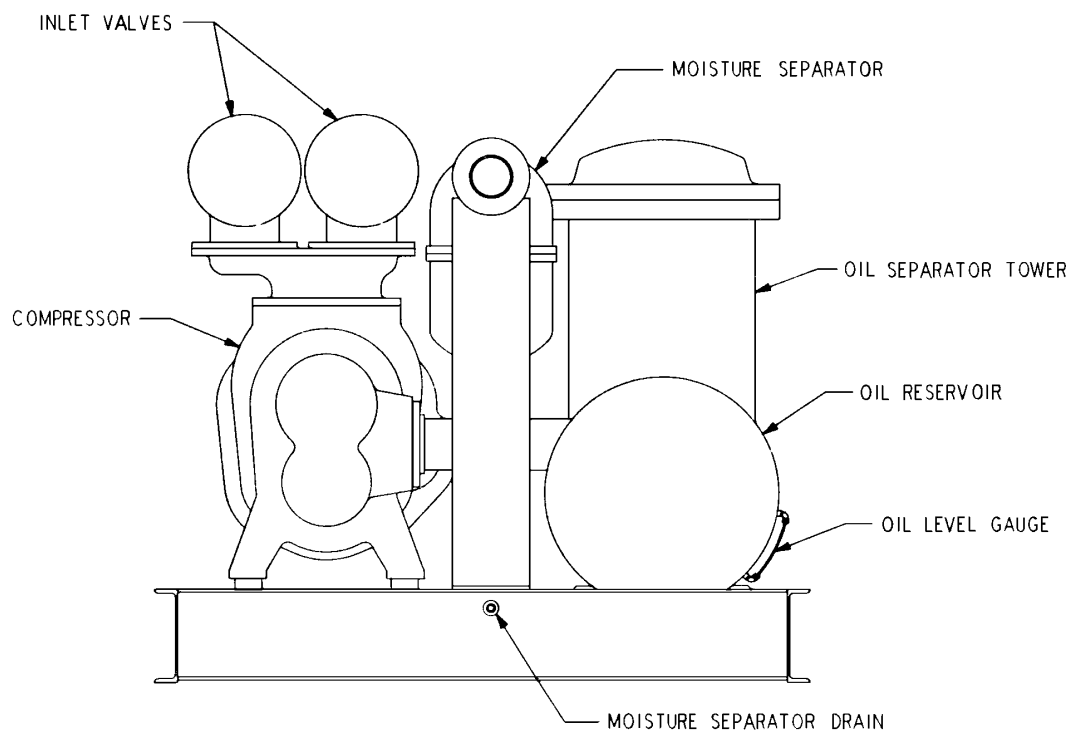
VIEW OF WATER COOLED UNIT WITH AFTERCOOLER (LESS ENCLOSURE) COMPRESSOR - RESERVOIR END
